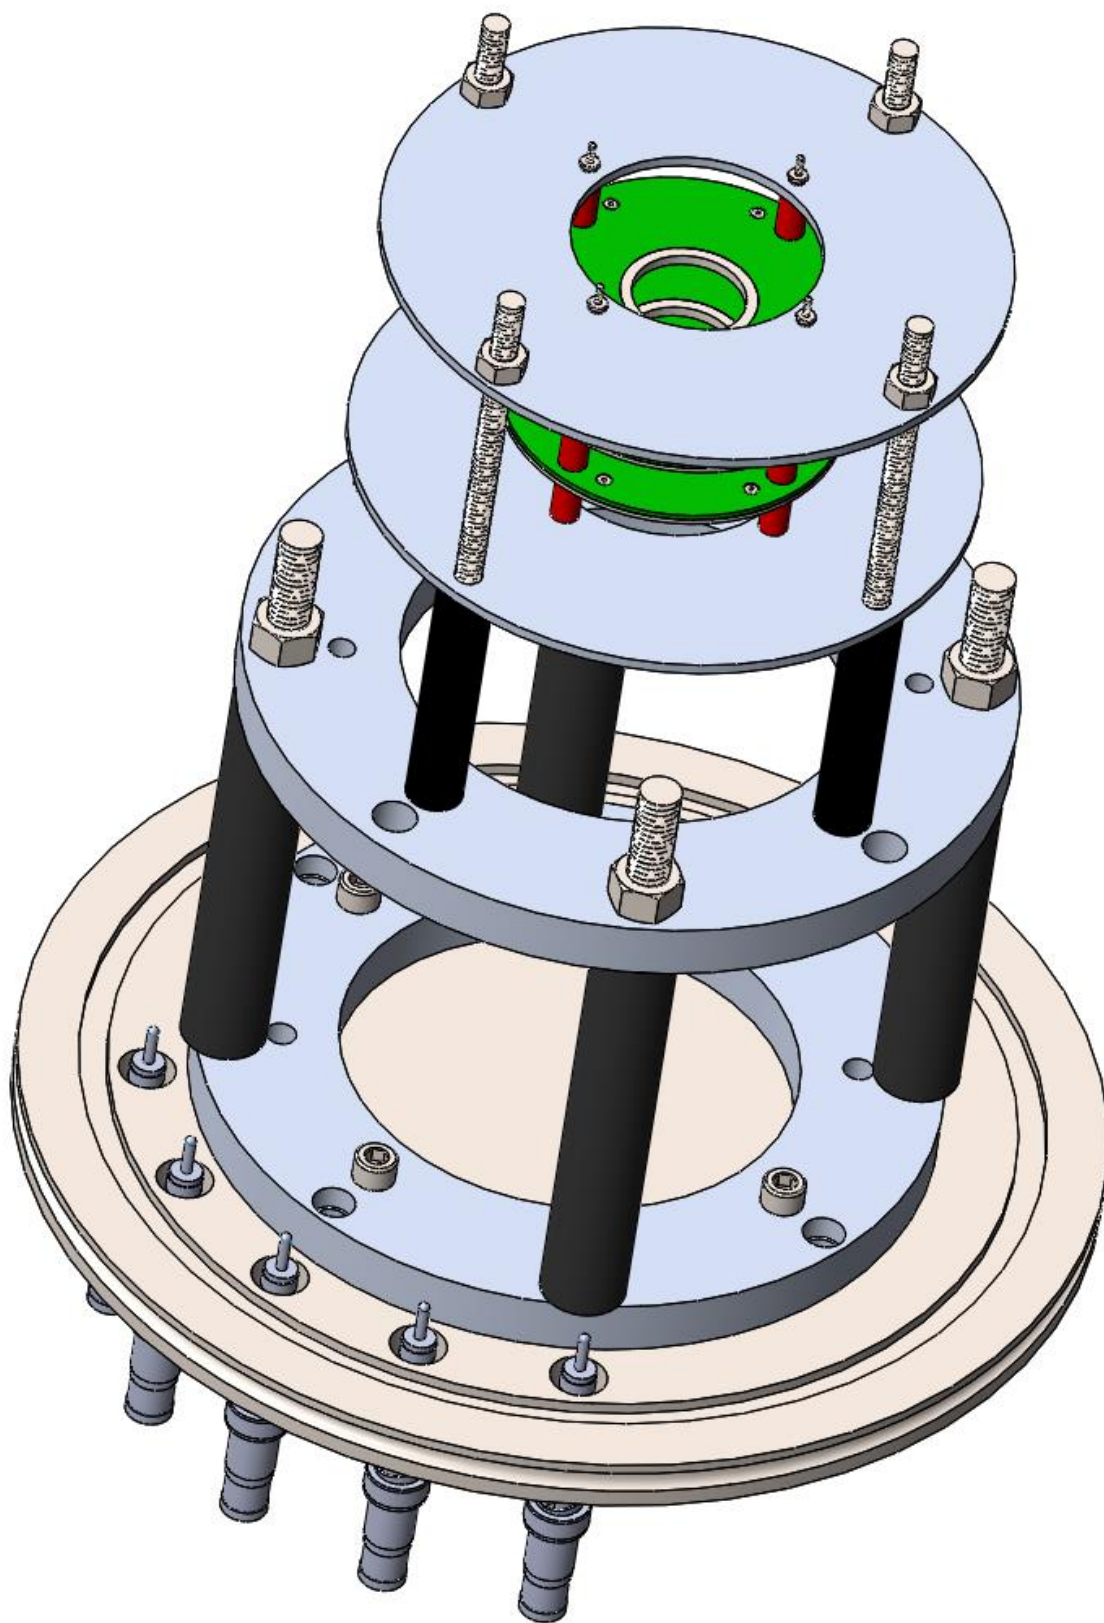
View of the entire mounting assembly and mass spectrometer, drawn to scale.
